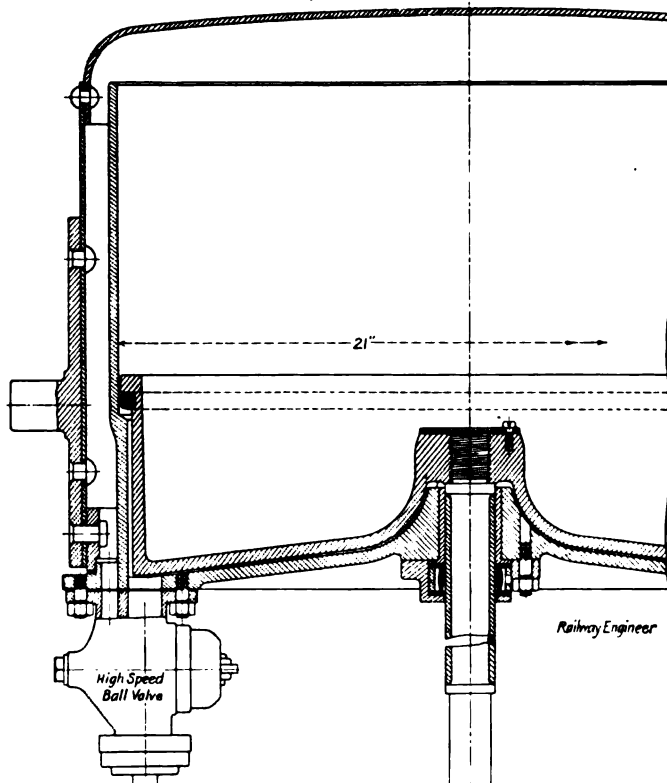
Cylinder for High-Speed Vacuum Automatic Brake.
